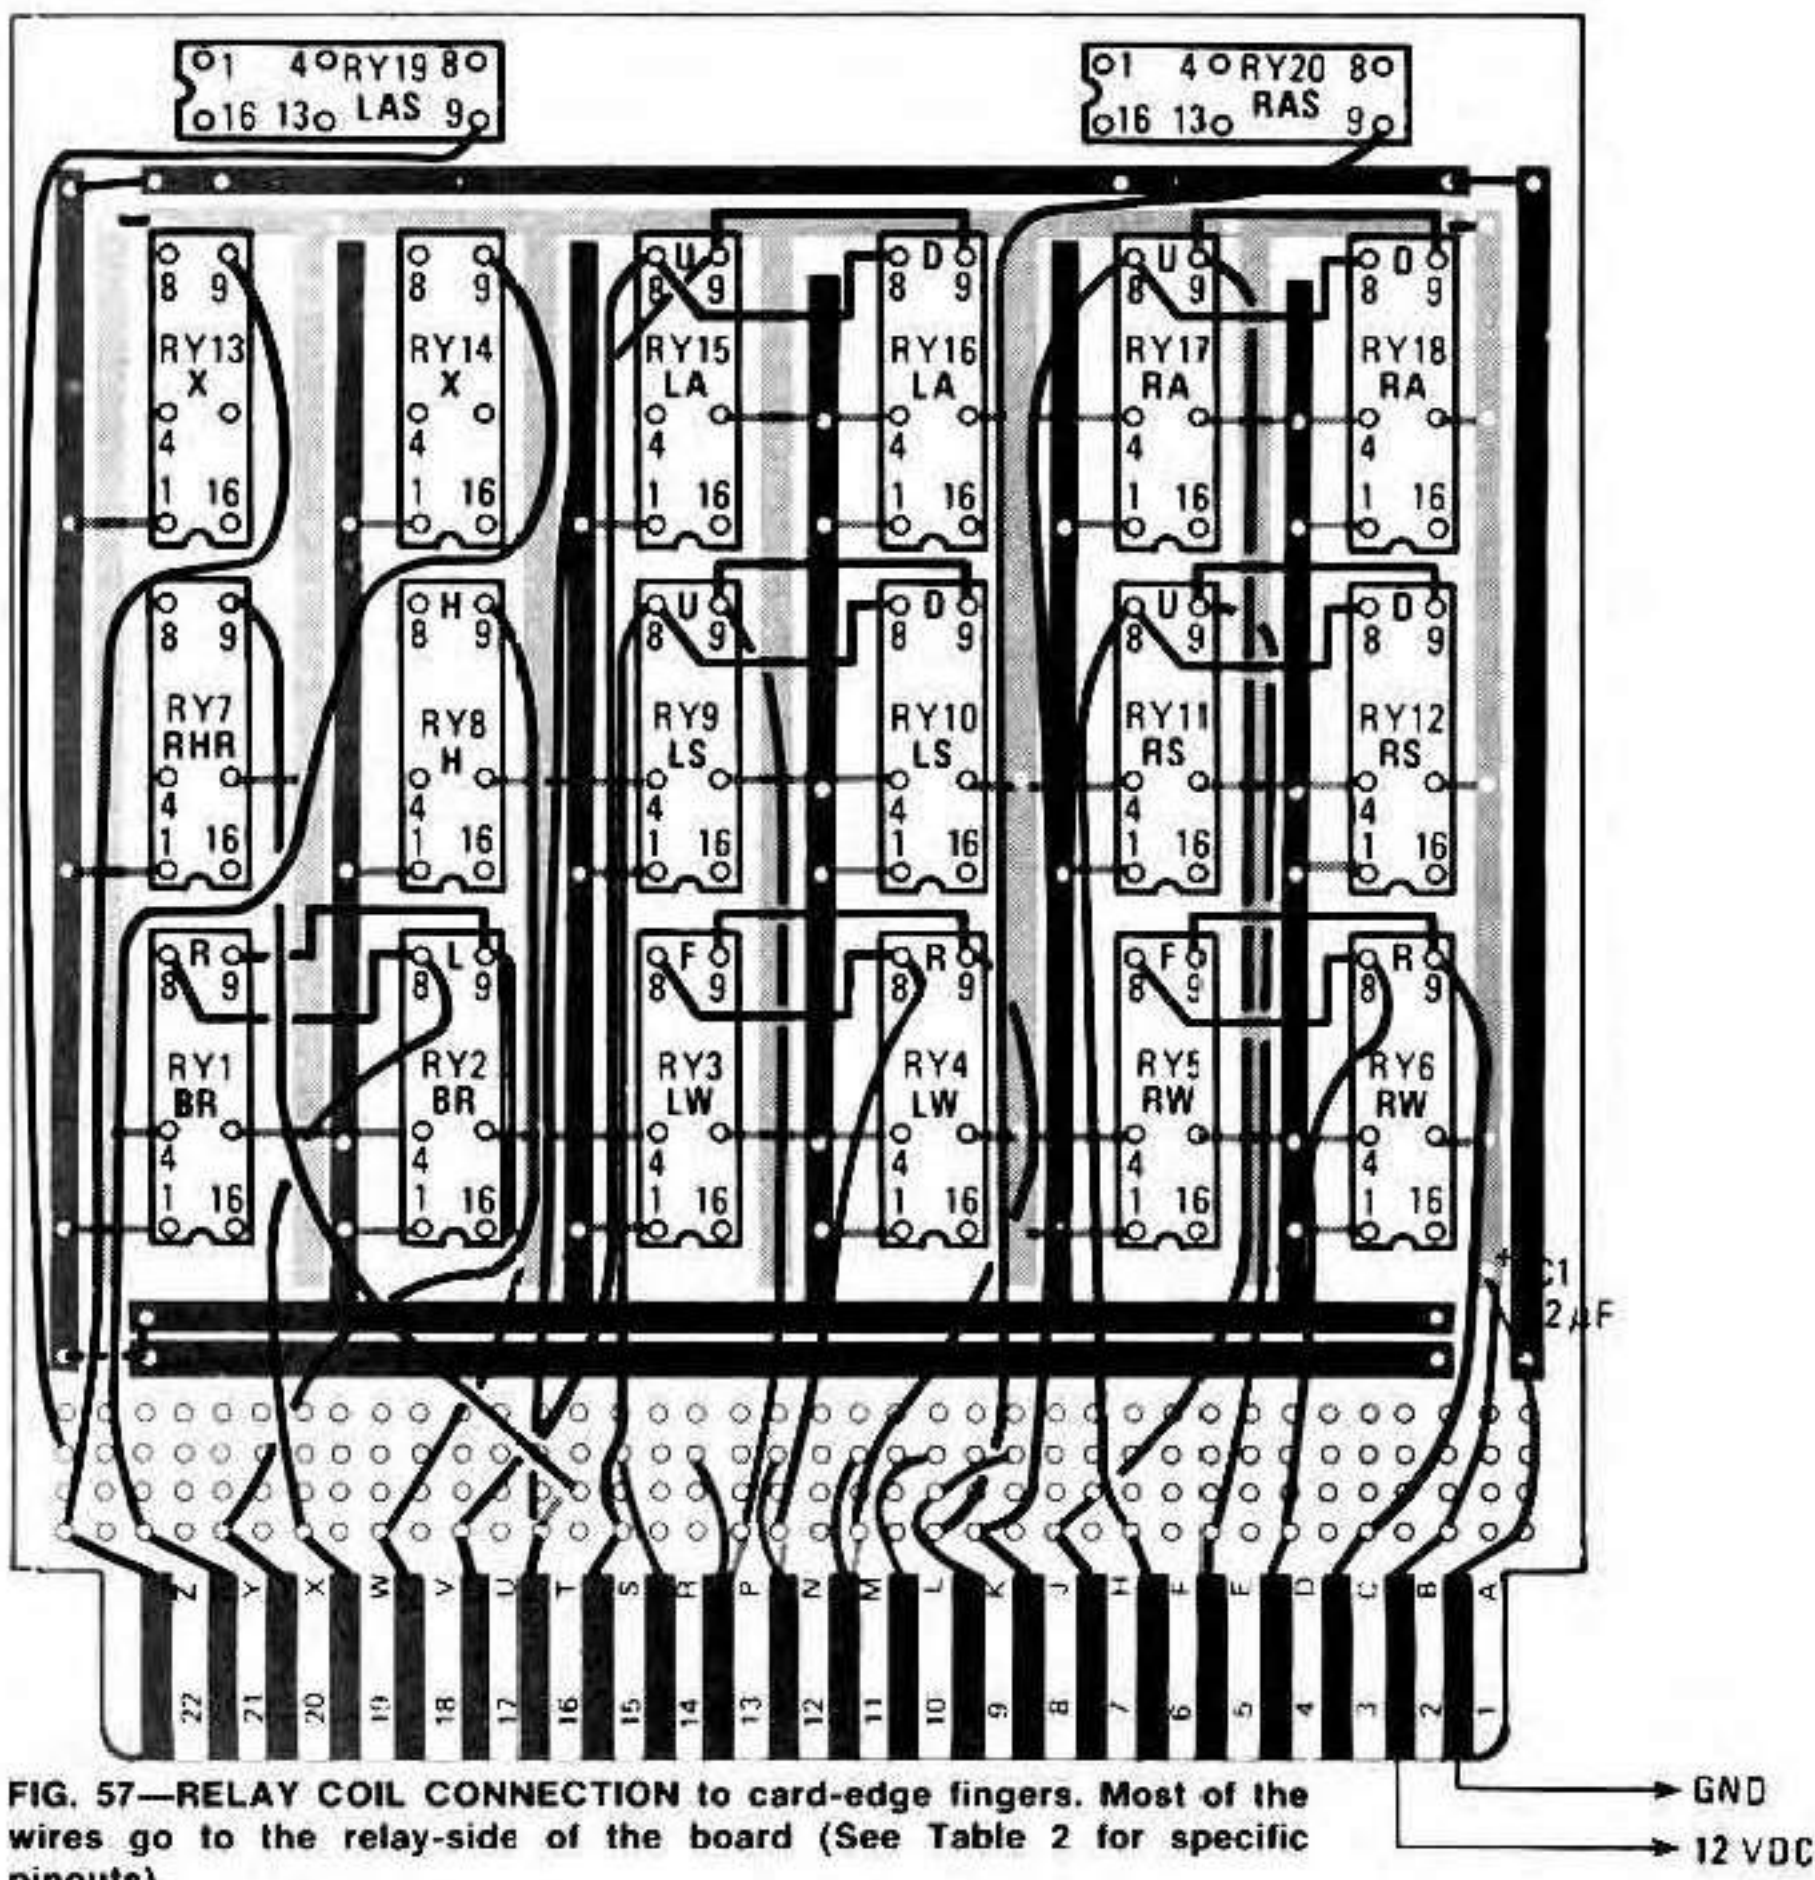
RELAY COIL CONNECTION to card-edge fingers. Most of the wires go to the relay-side of the board (See Table 2 for specific pinouts).
